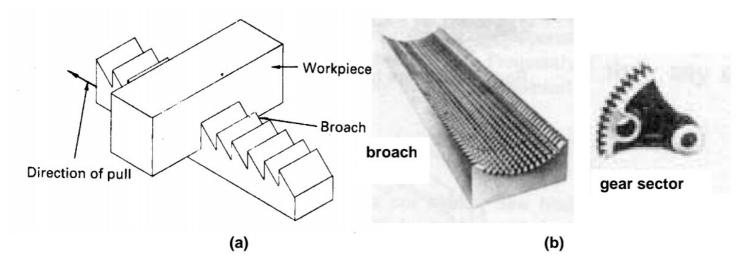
Typical external broaching (a) making slot (b) teeth of gear sector
